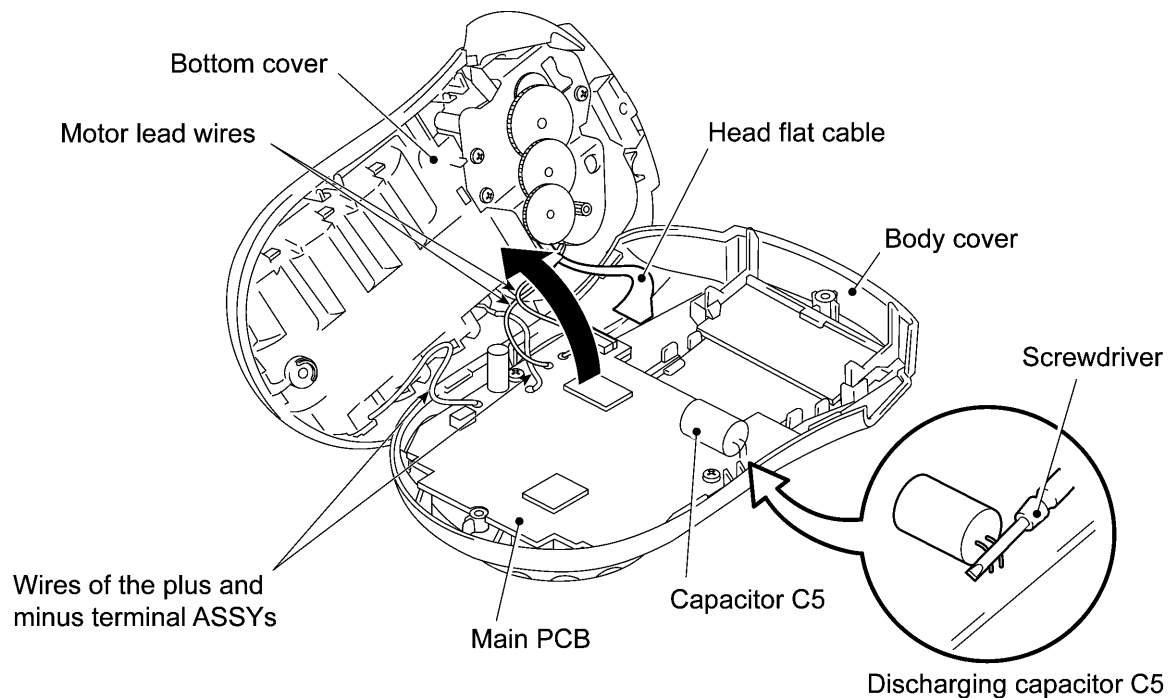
Discharging Capacitor C5 and Disconnecting the Head Flat Cable
